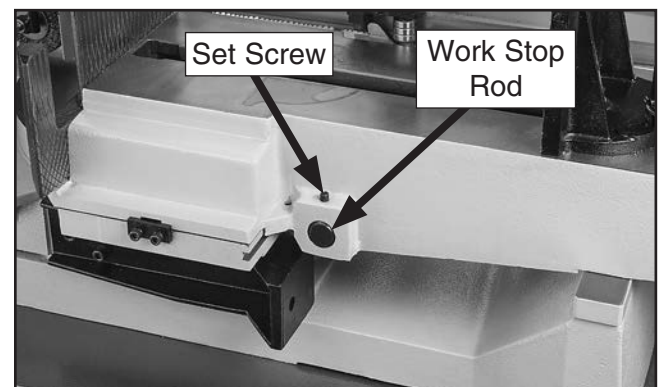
Location of rear set screw for setting stop rod flush with vise bed casting.
